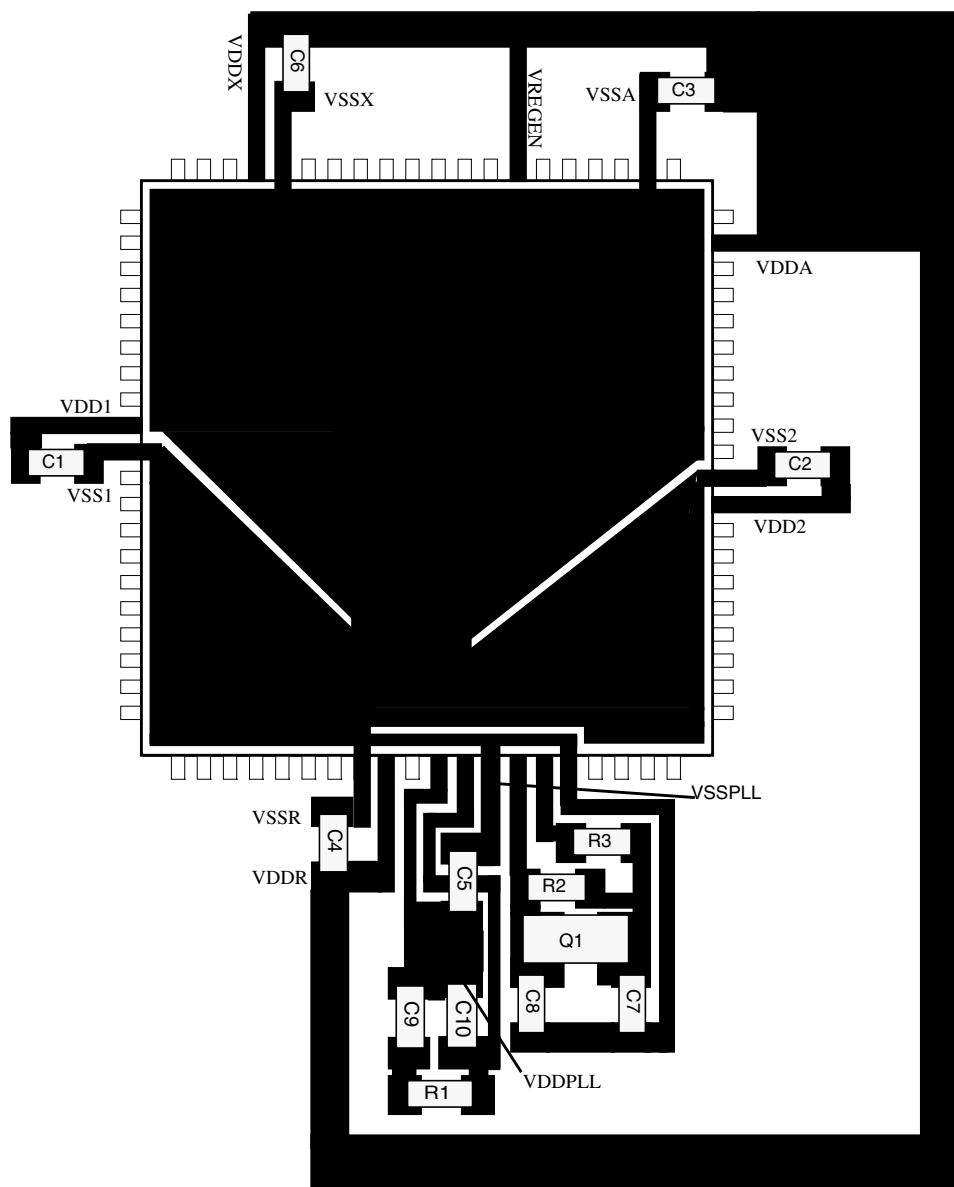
Recommended PCB Layout for 80QFP Pierce Oscillator
